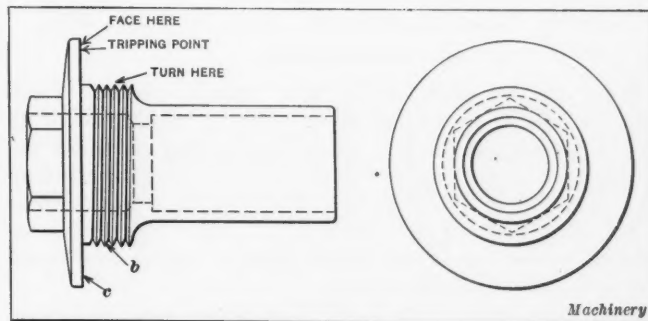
Piece which is turned, faced and threaded by Tool shown in Fig. 6
